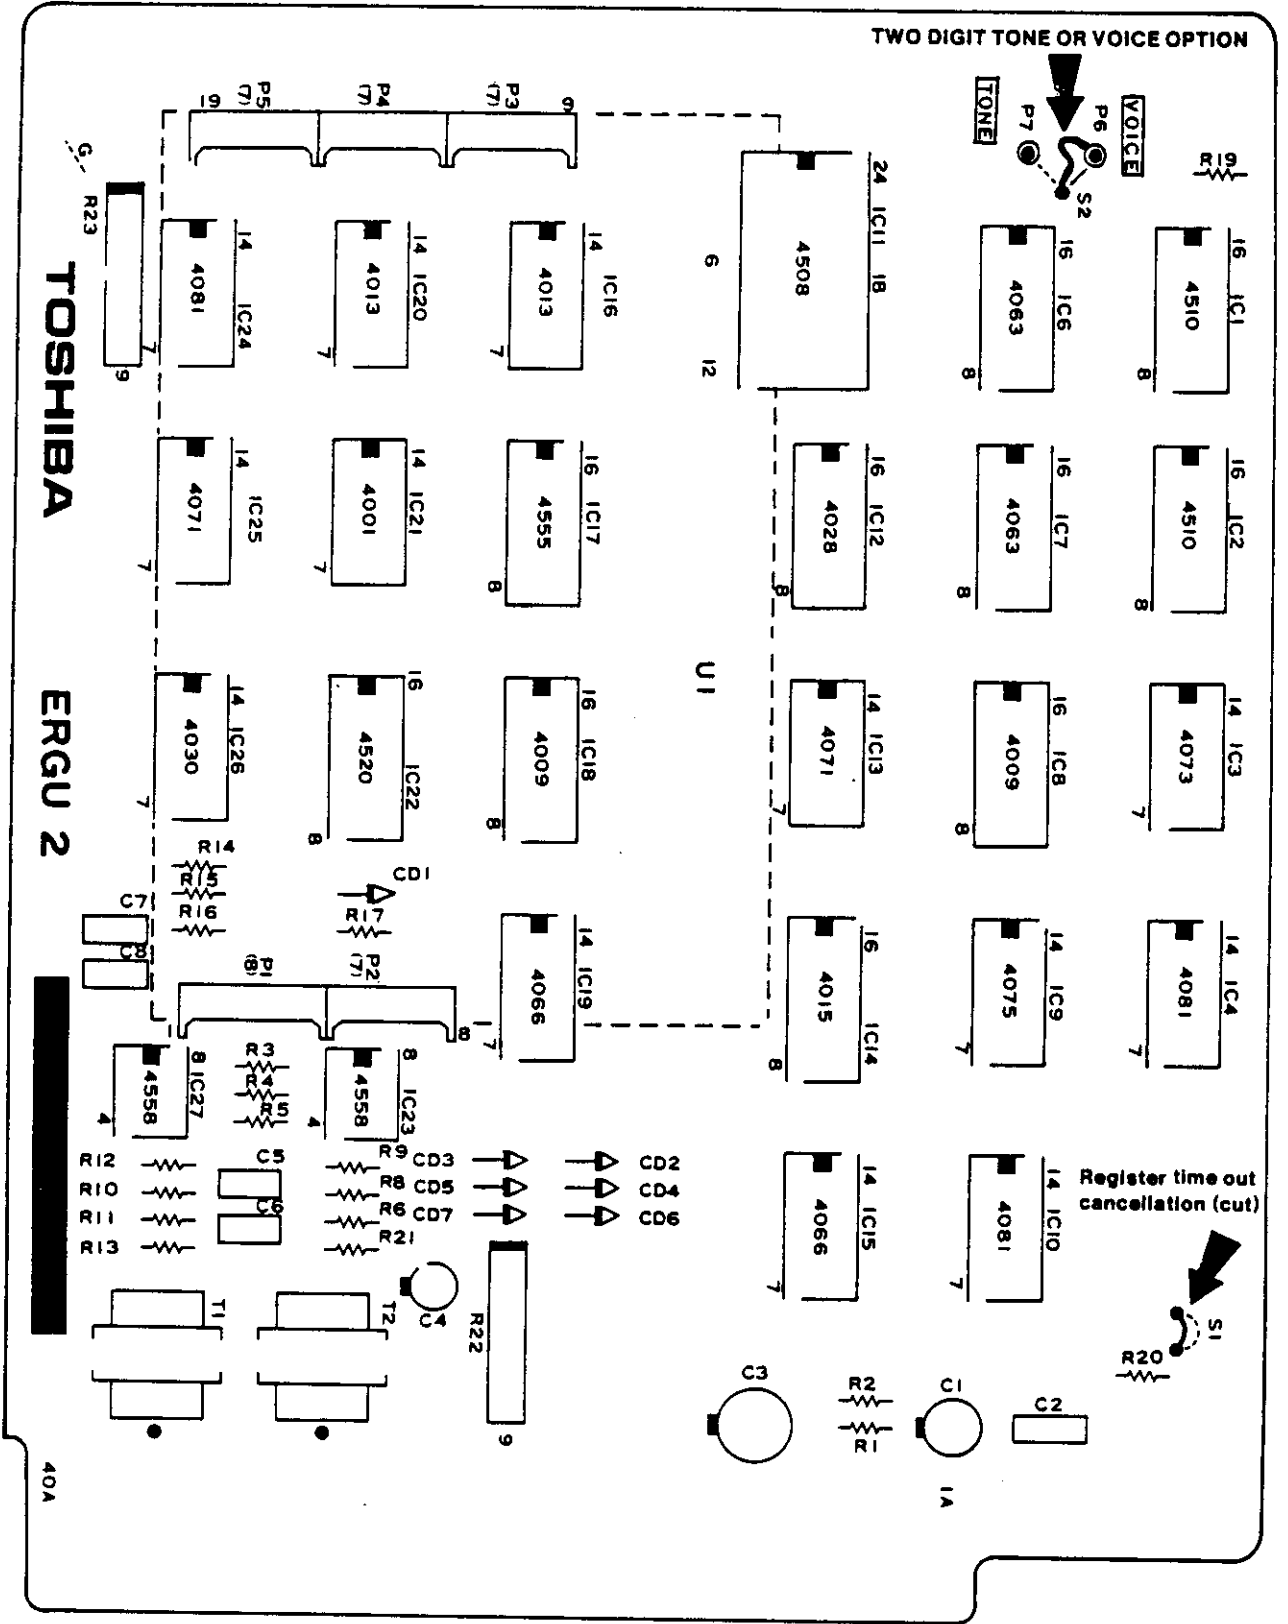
ERGU - PHYSICAL LAYOUT
